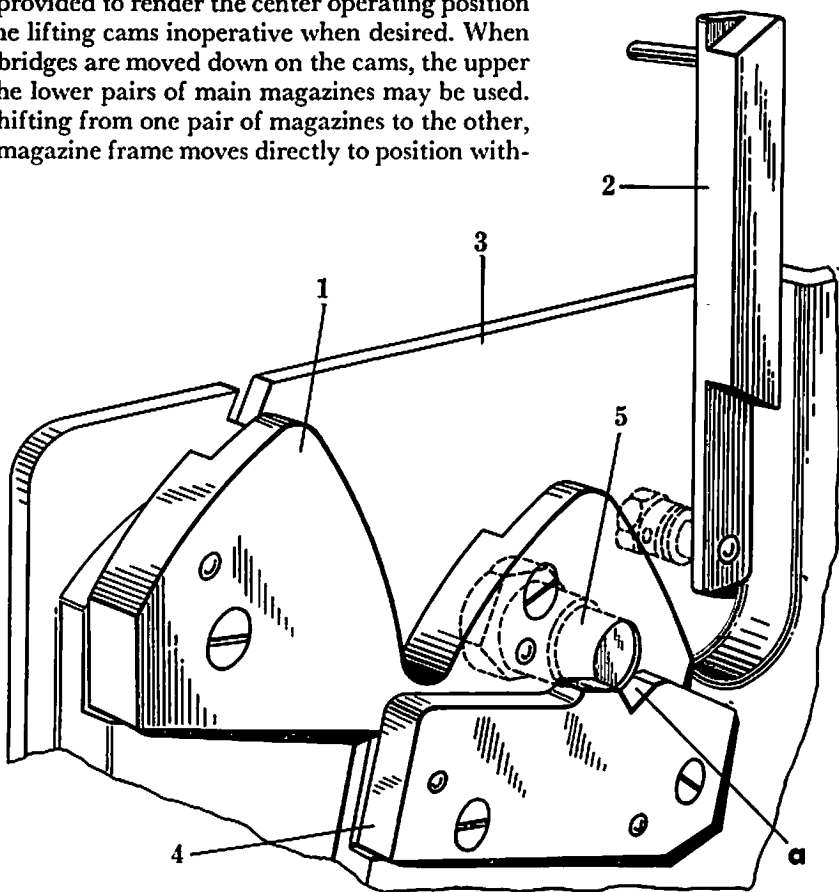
Magazine Frame Lifting Cam. This type of cam 1 is provided on double distributor machines to raise the magazines clear of the escapement rods during a magazine shift. An eccentric magazine frame lower shaft is provided on single distributor machines for the same purpose.
